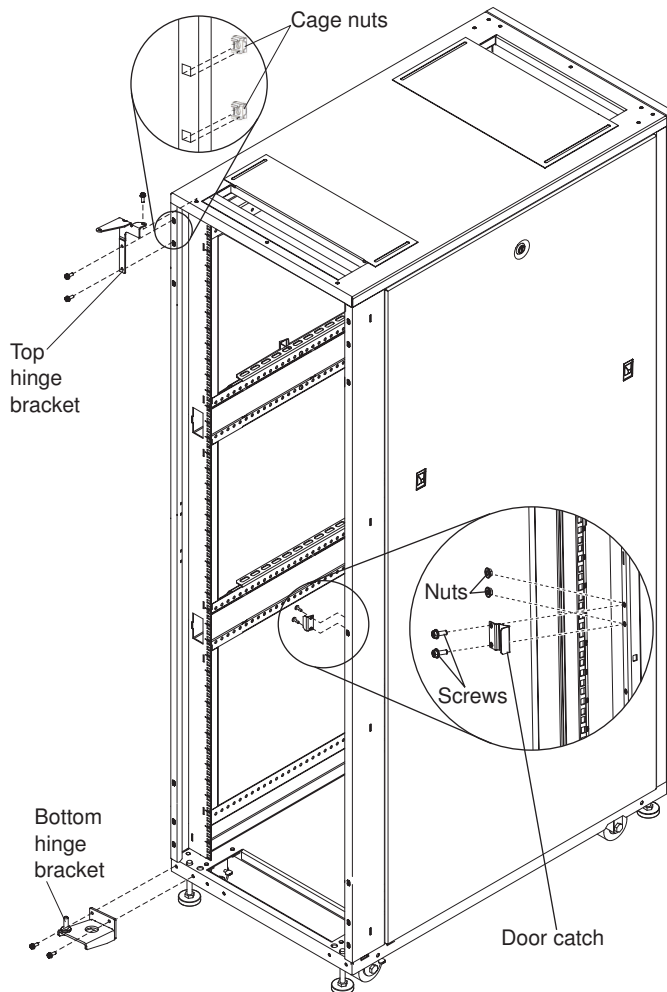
Installing the cage nuts, top and bottom hinge brackets, and the door catch (all rack models)
